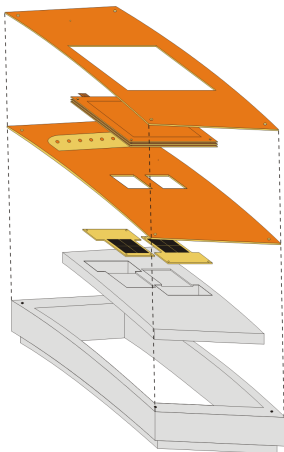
Exploded view of the multi chip readout module for the large prototype TPC.
